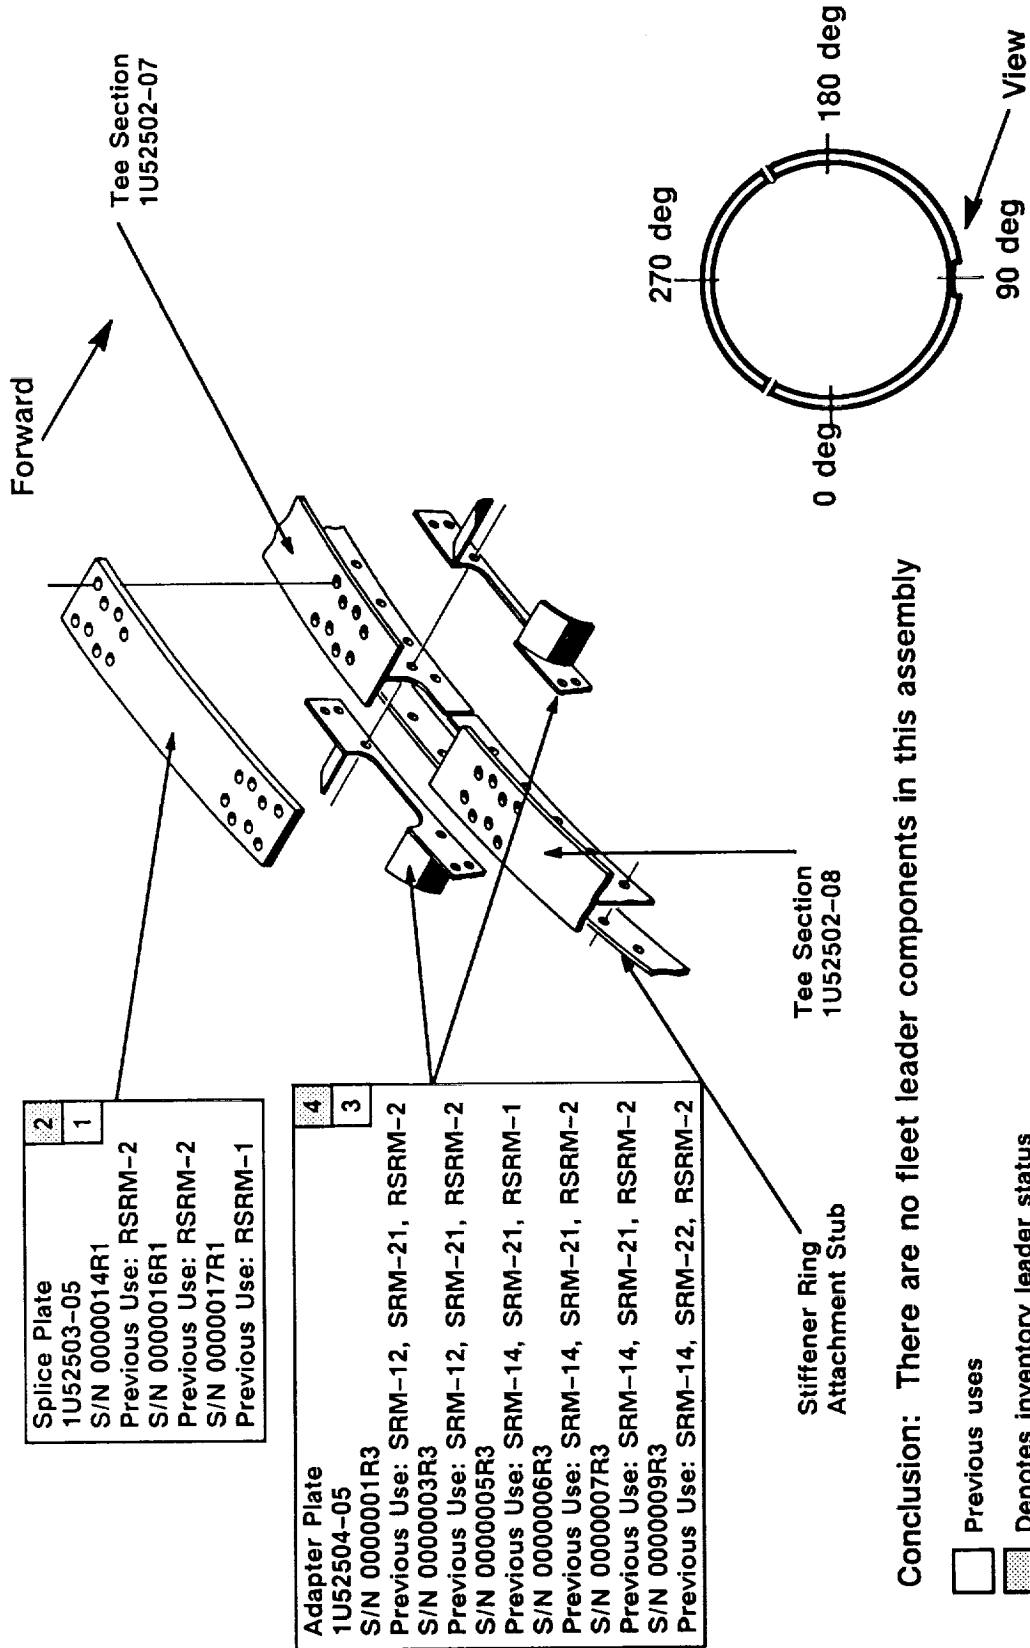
Case Segment Reuse History (LH) 360L009A Stiffener Rings at Systems Tunnel Joint
